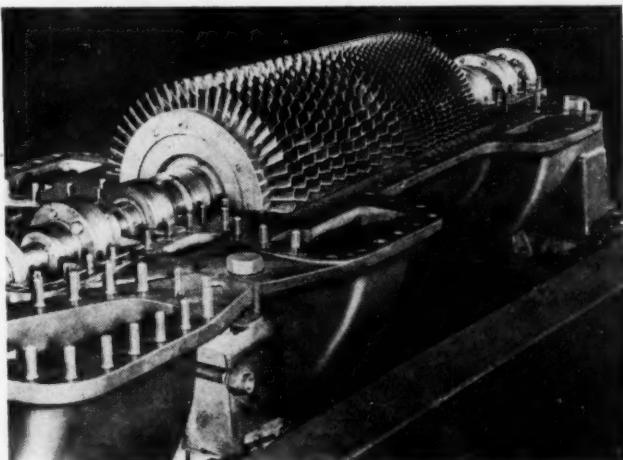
AXIAL COMPRESSOR WITH TOP CASING REMOVED
